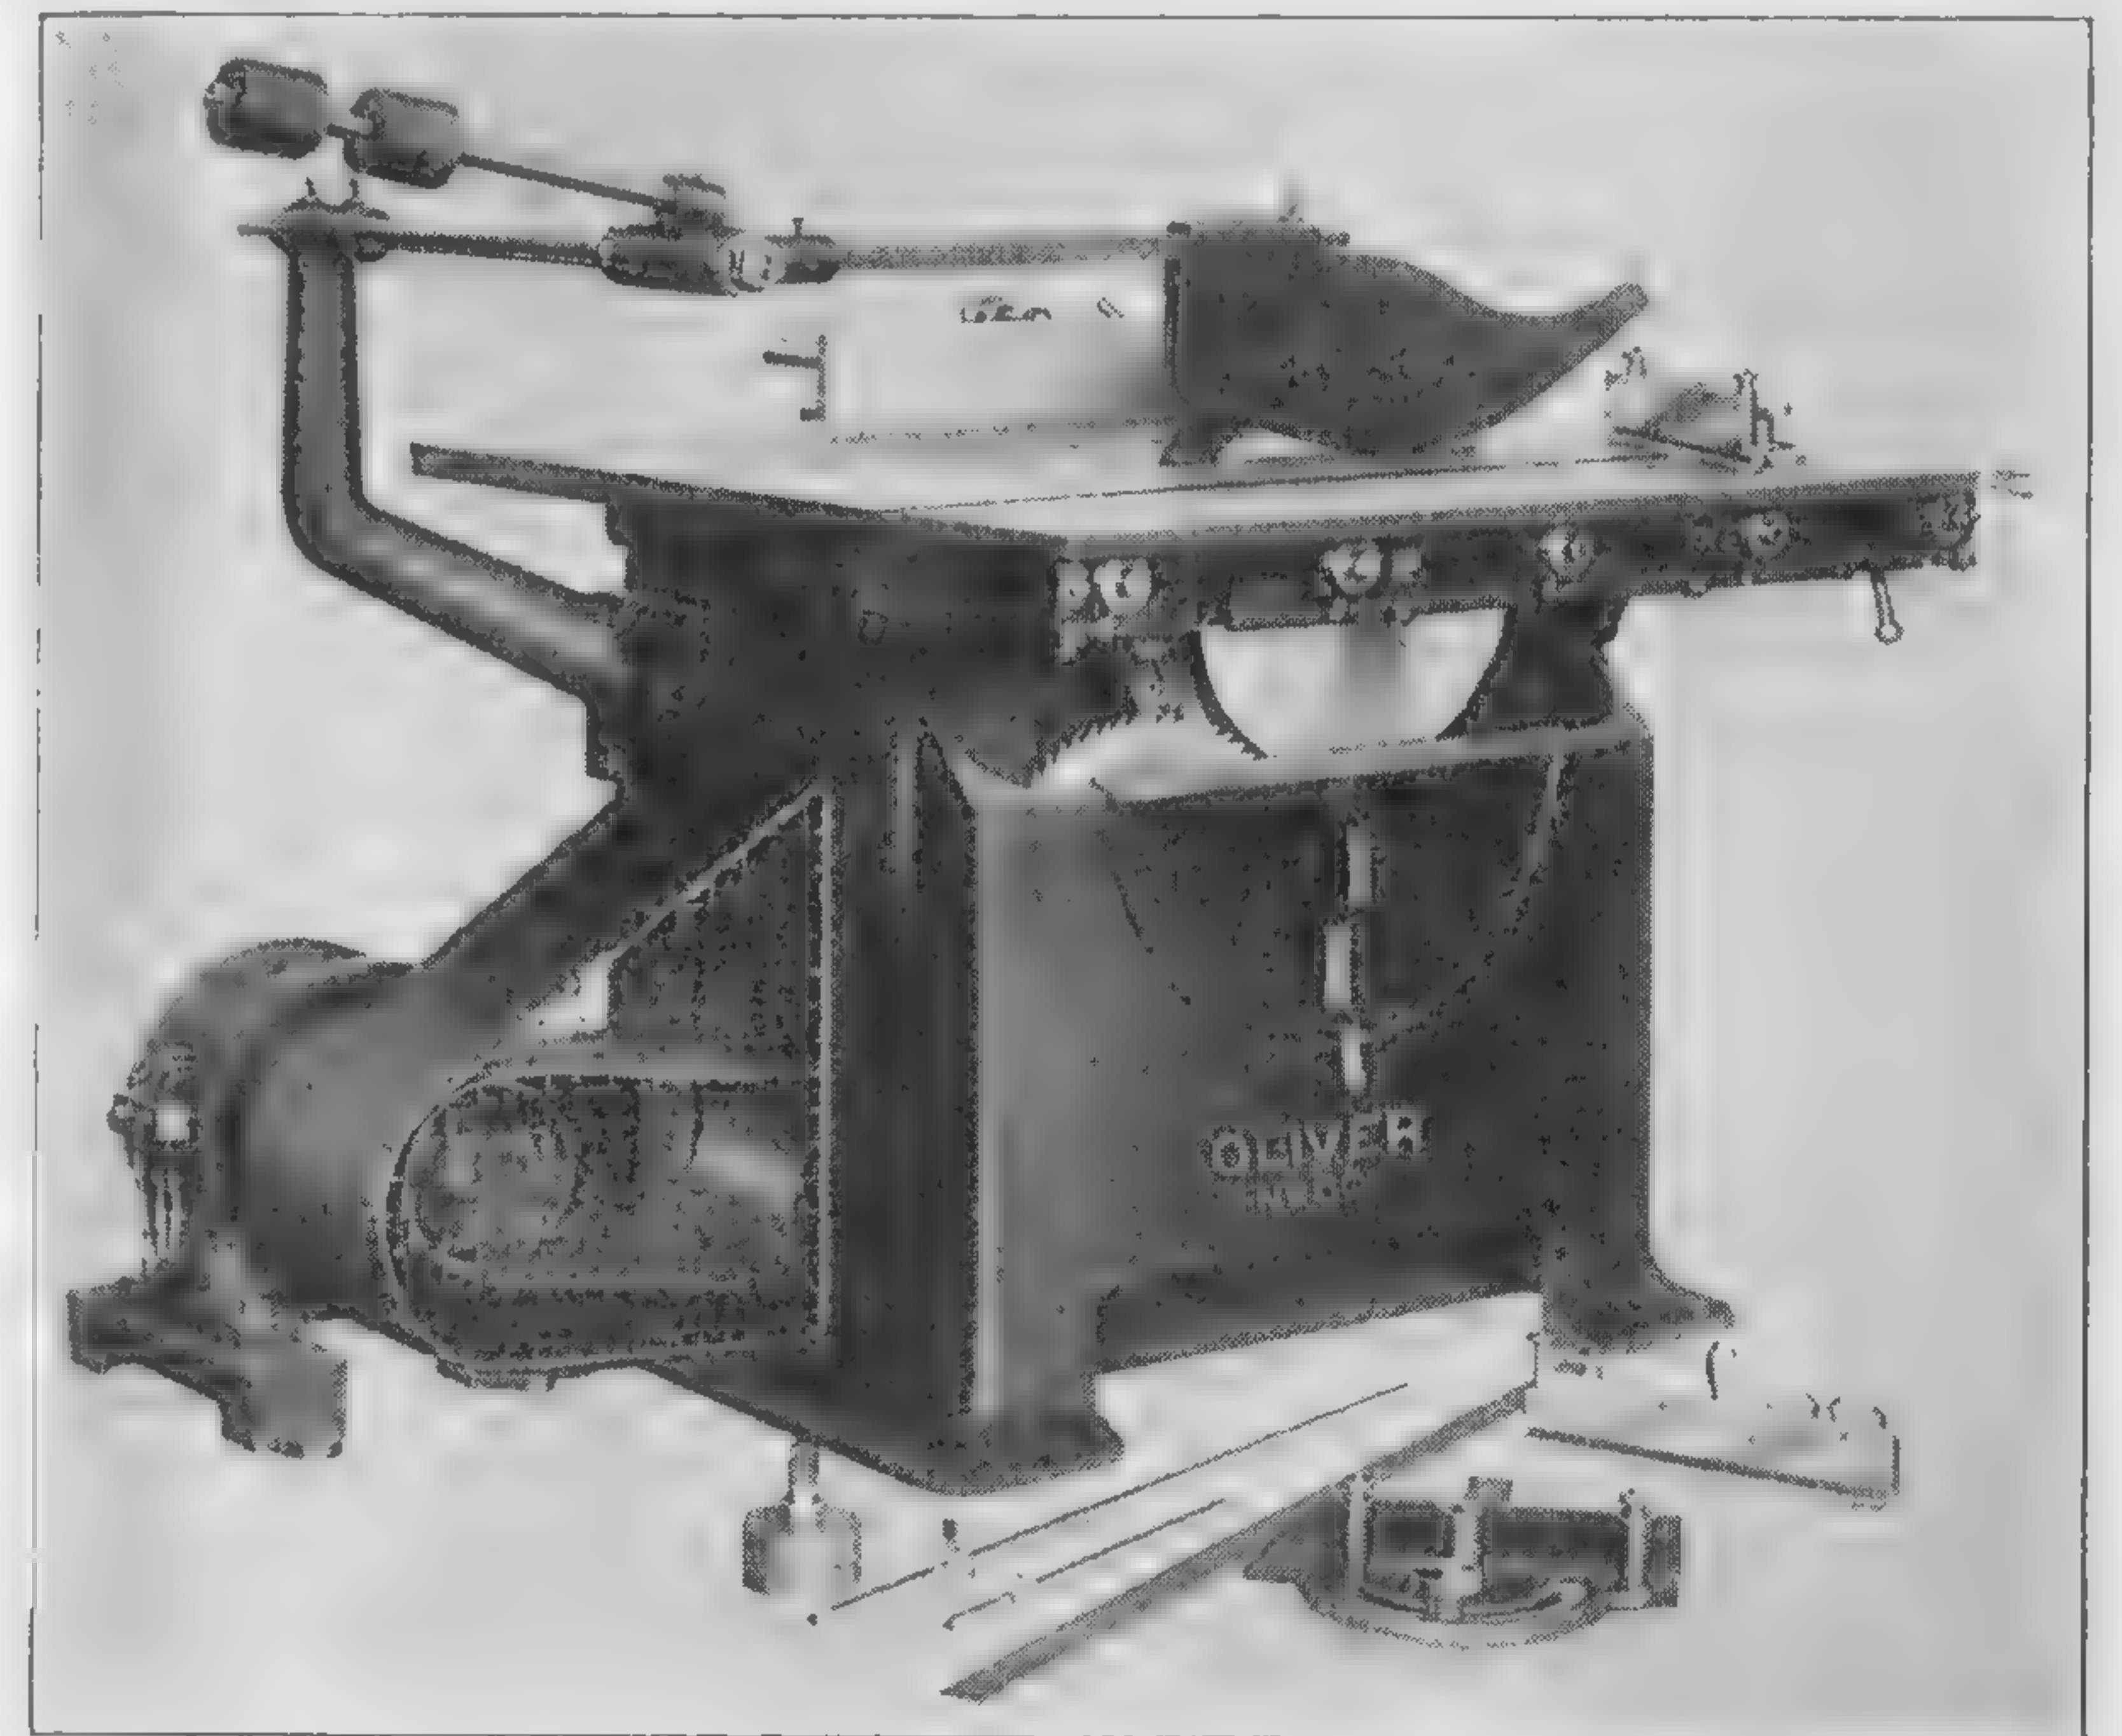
Universal Saw Bench with Self-Contained Motor Drive
